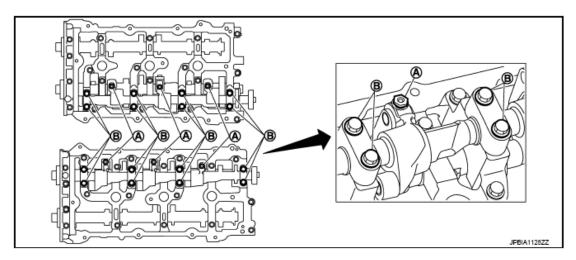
Identifying VVEL Ladder Assembly Adjusting And Mounting Bolts Courtesy of NISSAN NORTH AMERICA, INC.
